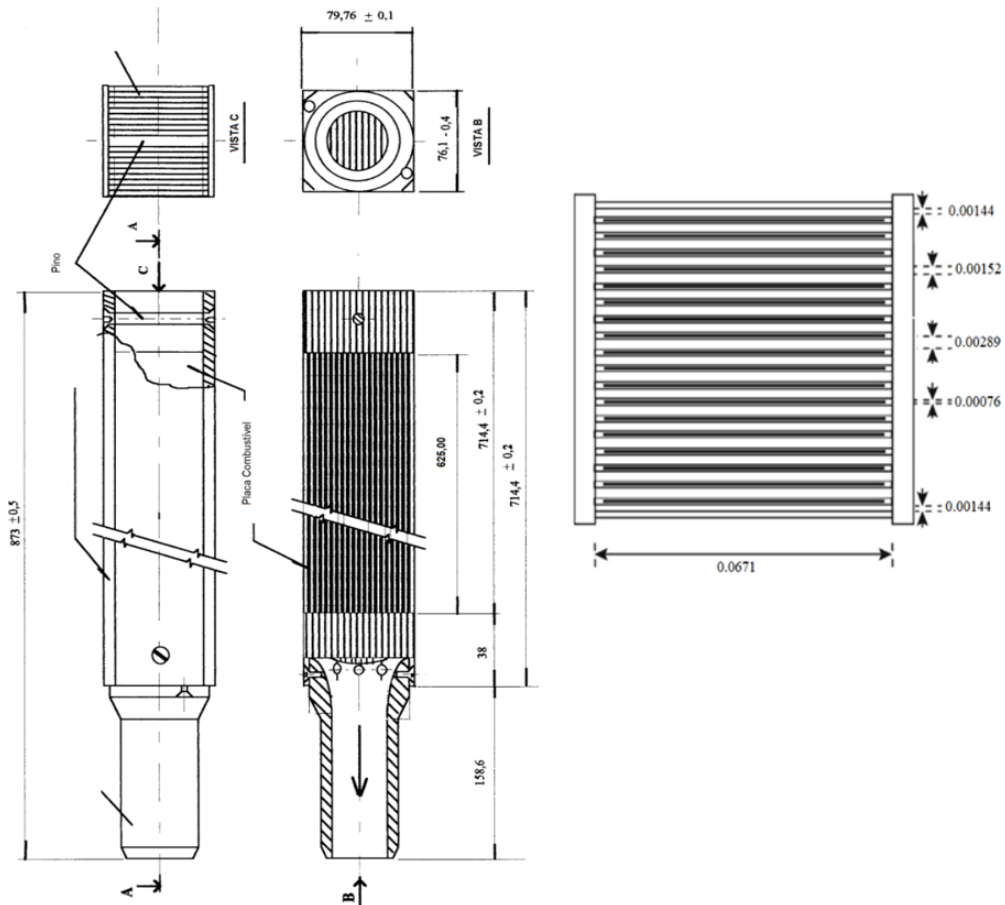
Radial and axial dimensions of Instrumental Fuel Assembly from [12,13,14]
